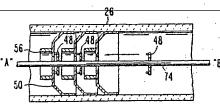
sectional View Illustrating Assembly of Cups and Discs Within Discharge Tube
